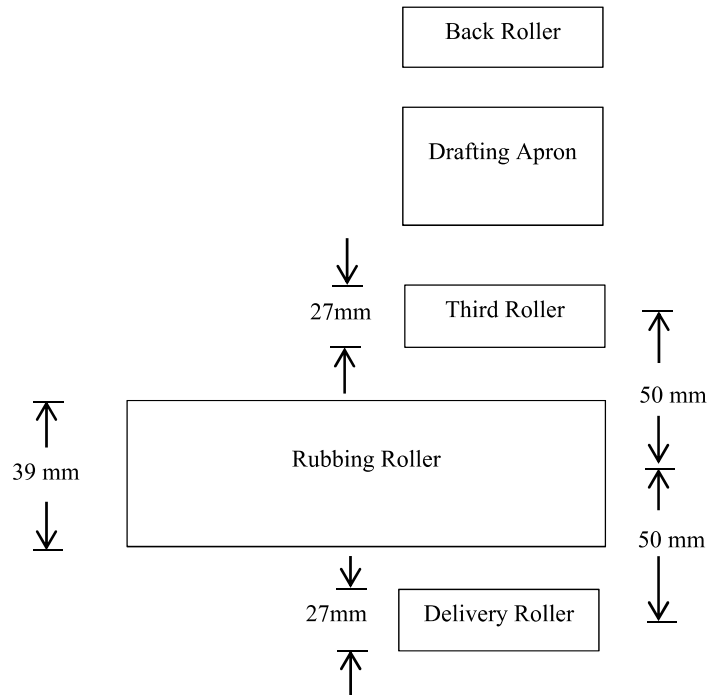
Schematic of rubbing assembly fitted in drafting system
